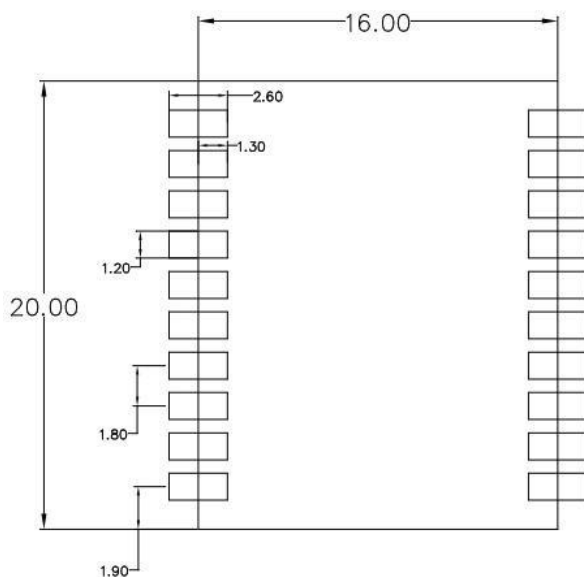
Recommended PCB Footprint Dimensions (Unit: mm)
